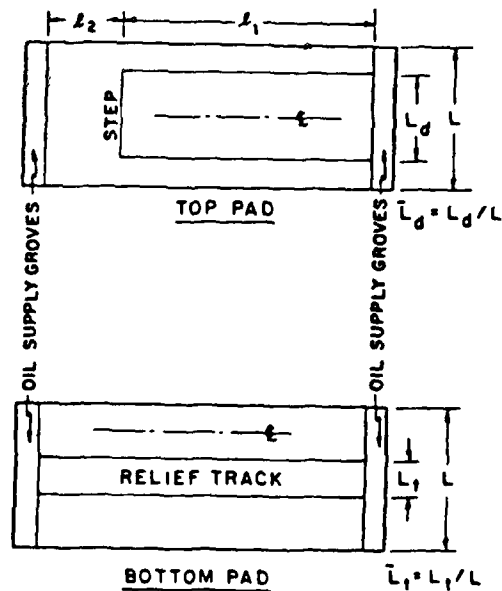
Pressure Dam Bearing Schematic, Top and Bottom Pads
